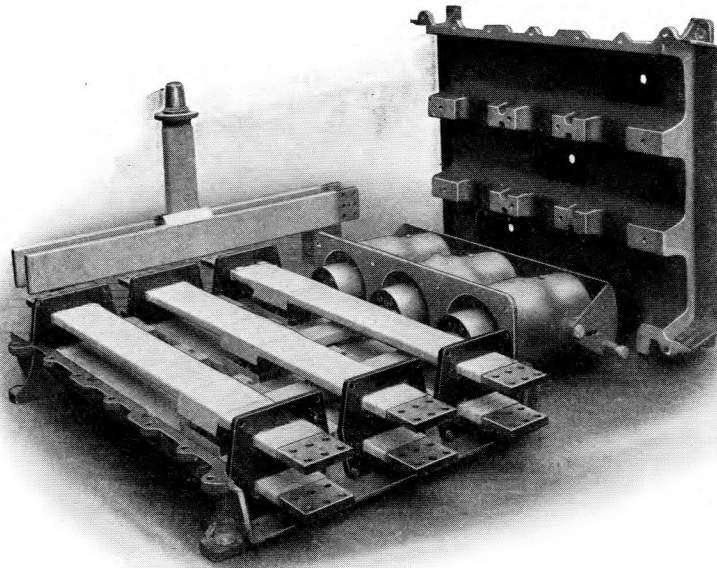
4,000-AMP. BUSBAR UNIT, PARTLY ASSEMBLED.
